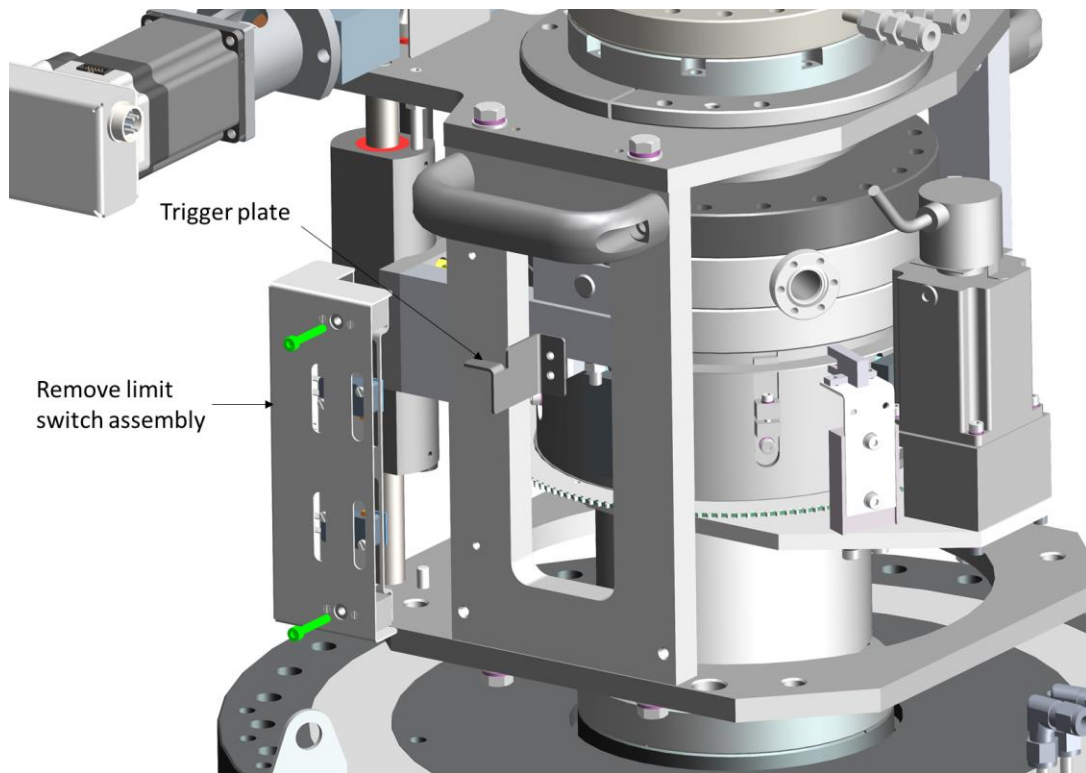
Schematic showing the removal of the limit switch assembly (automated transfer system).
